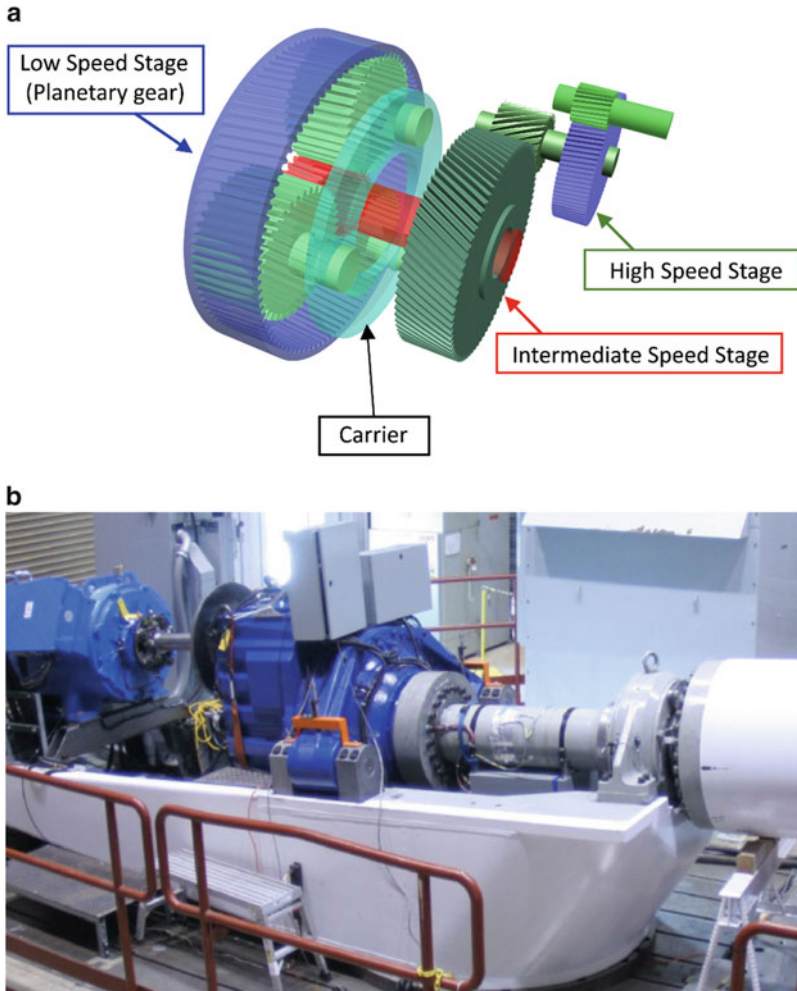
GRC wind turbine drivetrain (a) Drivetrain components (b) Drivetrain for dynamometer testing (Guo et al. 2012b)
